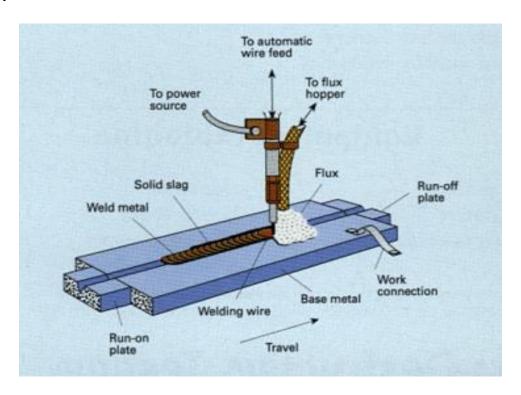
7- Submerged Arc Welding Process. [G]
